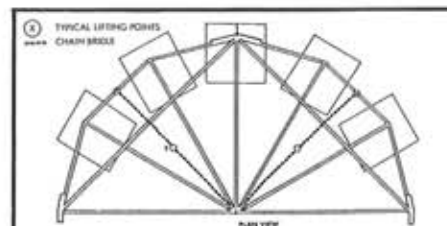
Plan view of the Turbosound cartwheel assembly.
